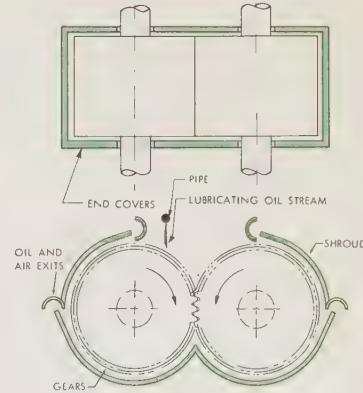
To reduce the windage losses and eliminate foaming of oil in the gear boxes, shrouds and exit openings were built into the gear boxes as shown in these sectional views.
